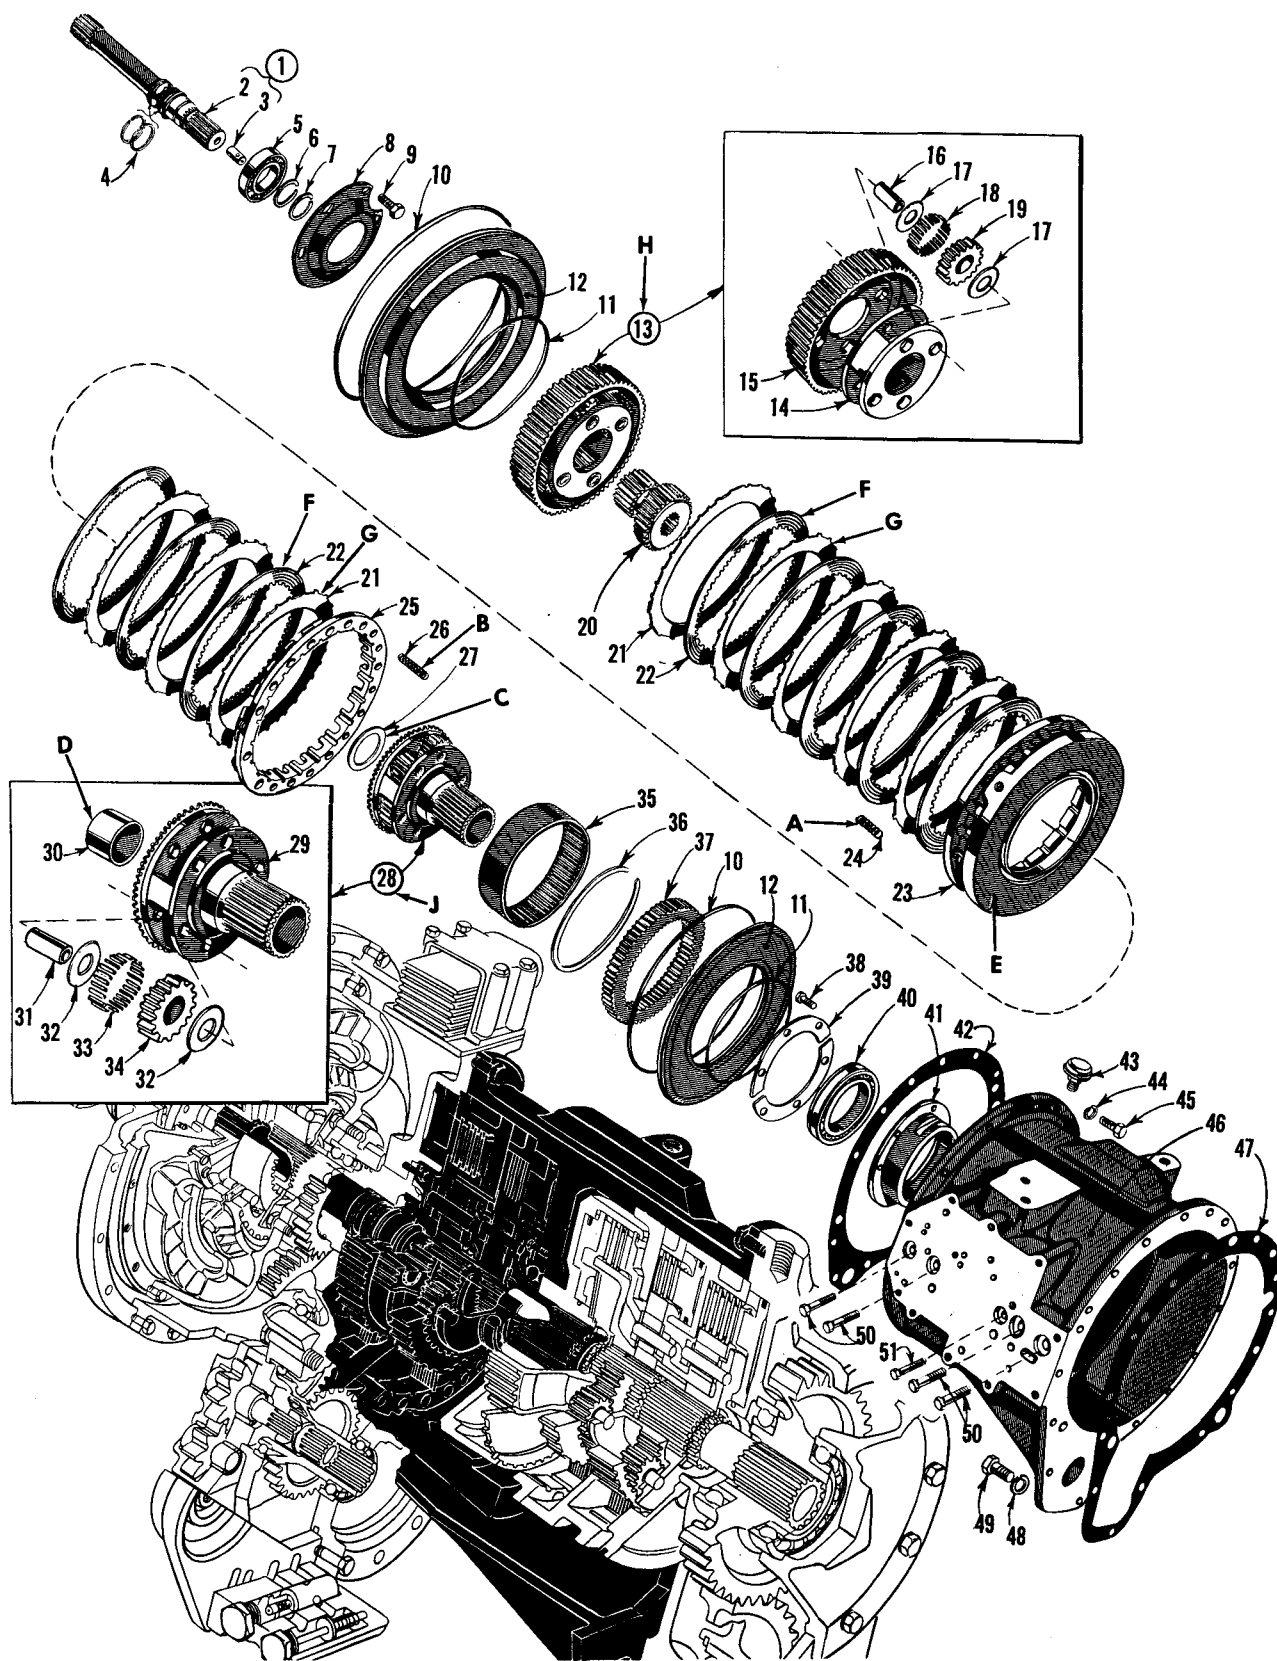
Forward and reverse planetary carrier assemblies and transmission housing group, exploded view
